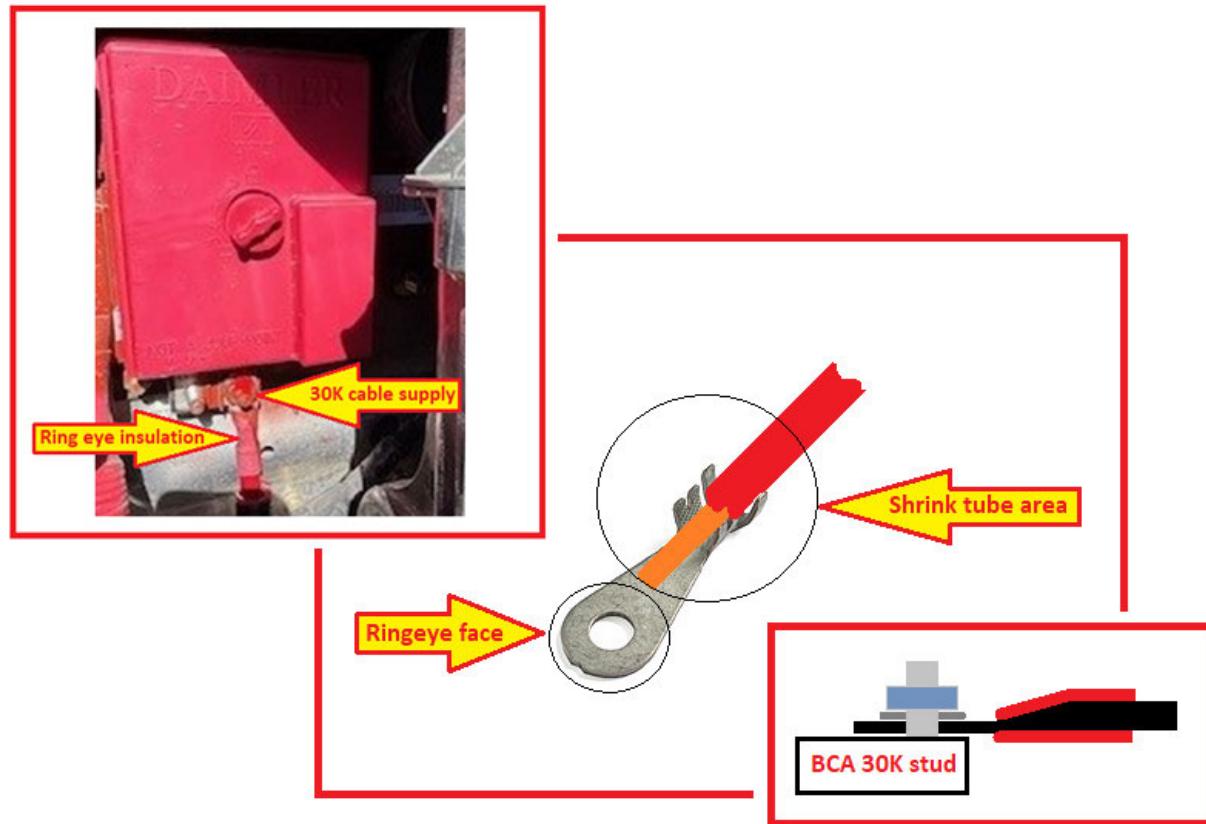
, BCA 30K Cable Location. No Shrink Tube Between Ring Eye and Mounting Washer and Terminal Insulation (heat shrink) spec.
